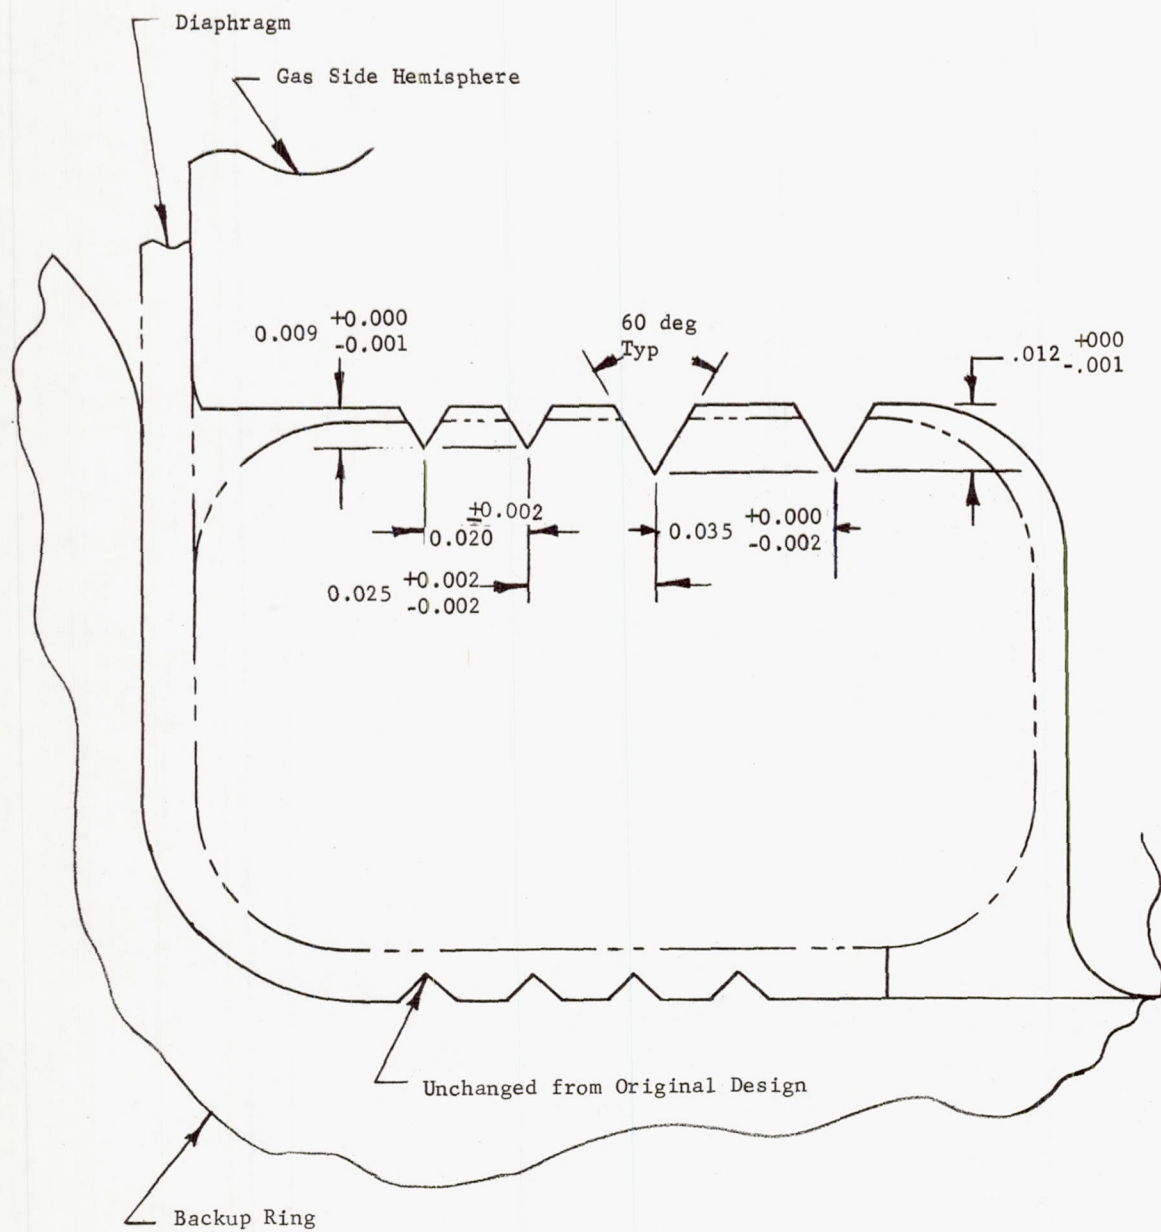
Oxidizer Tank, Improved Seal Joint Design
